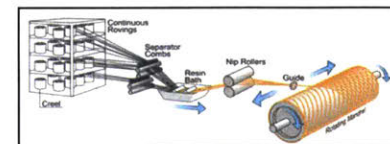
Filament winding process in industry making fiber-reinforced tubes.
